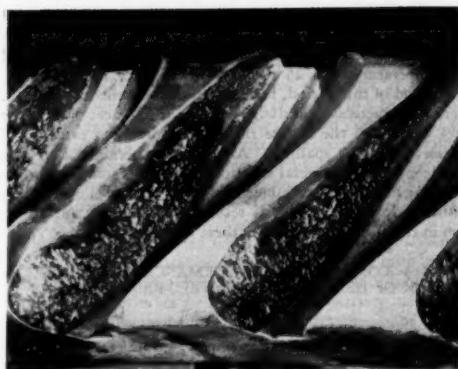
TOOTH SURFACES OF A BRONZE GEAR FROM A 75-HP SPEED REDUCER ARE SPALLED AND PITTED AFTER 6 MONTHS OF OPERATION WITH A SPECIFICATION 2-105-B GEAR OIL
